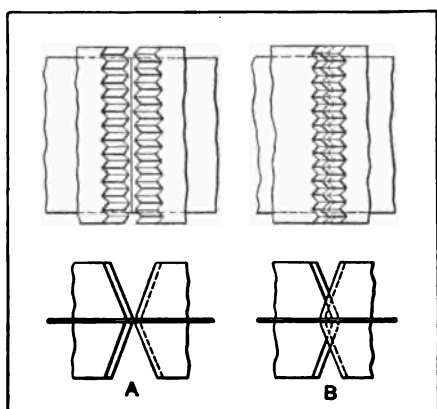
Method of arranging Clamping Jaws for Butt-welding Thin Strip Stock
